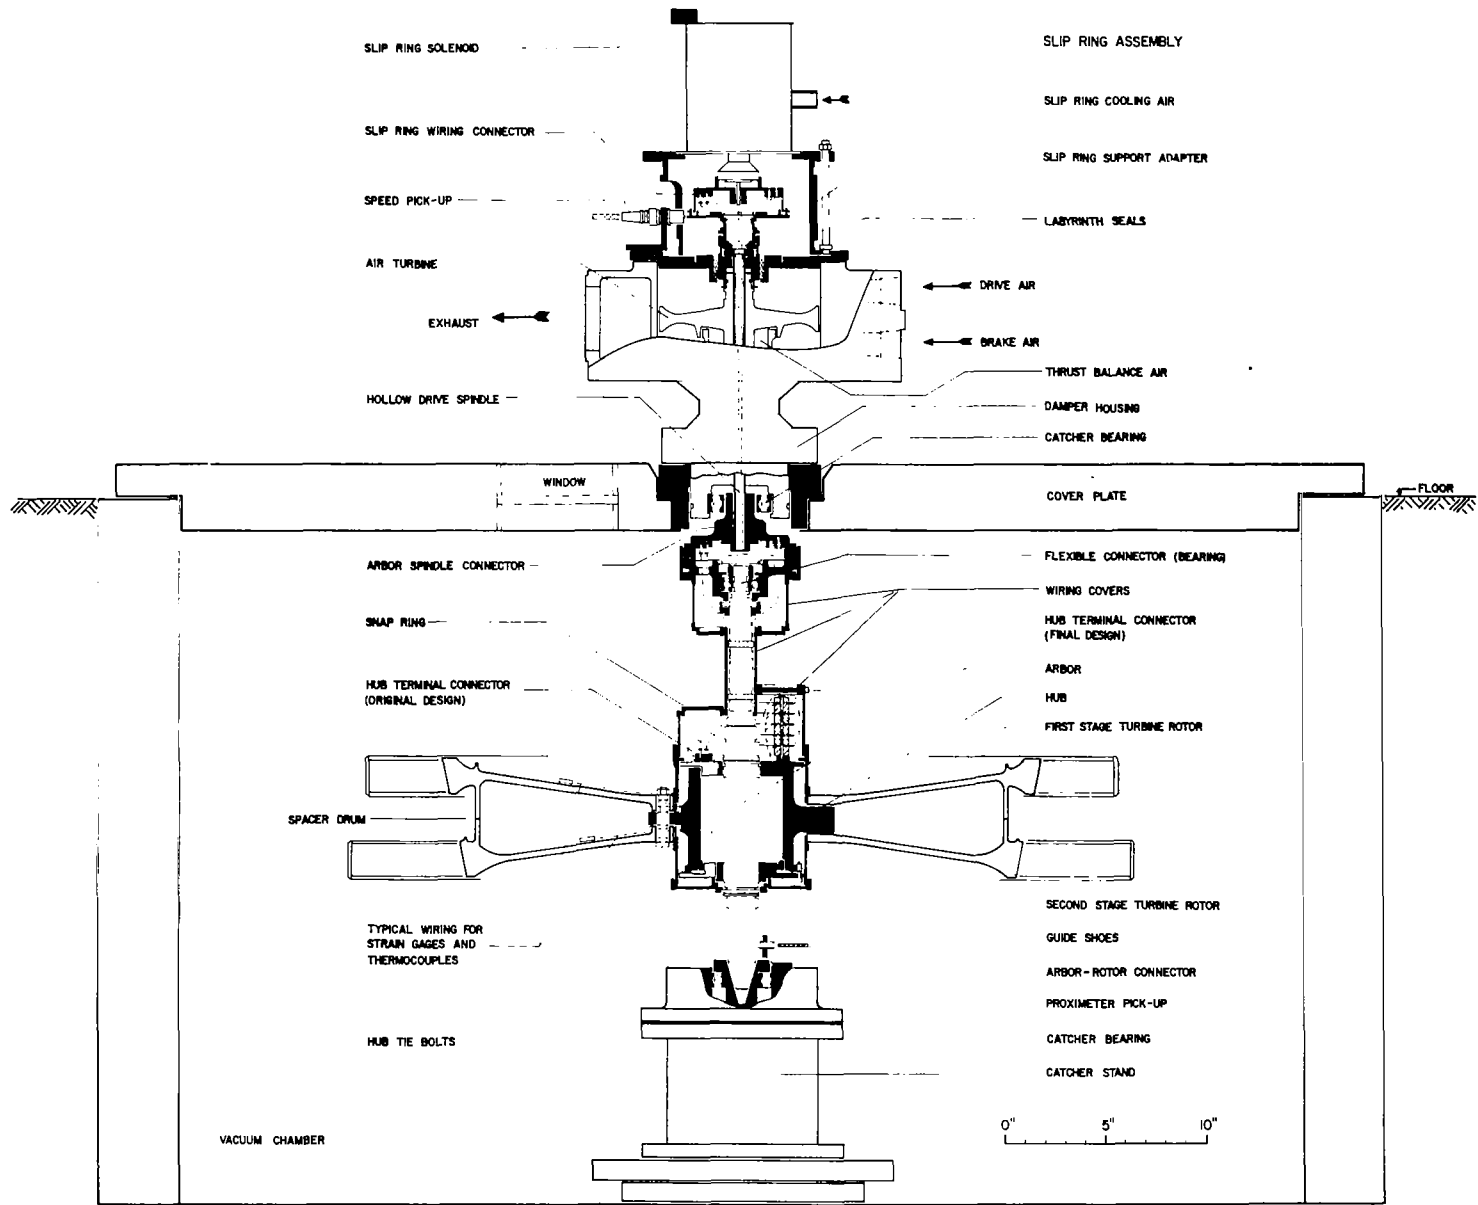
CROSS SECTION OF TEST ROTOR IN SPIN PIT
